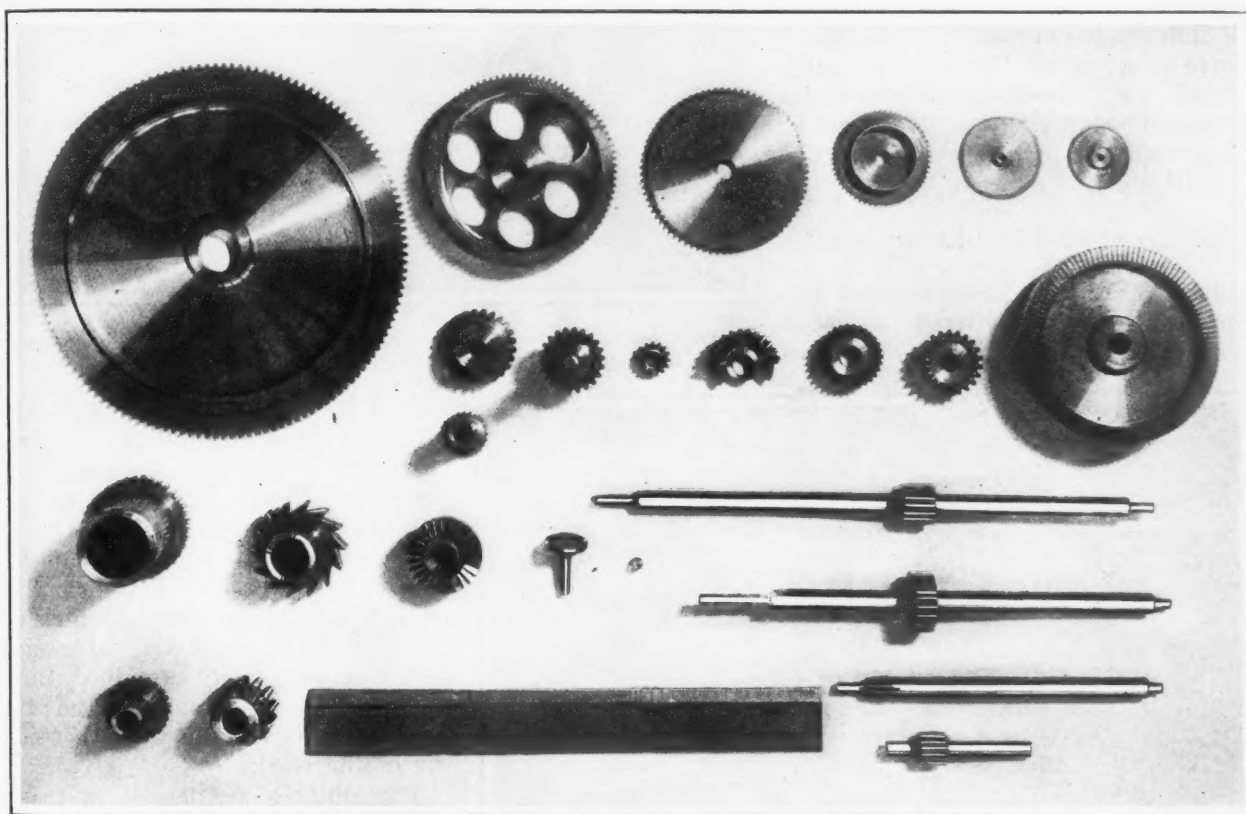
Spur and Bevel Gears and Other Parts Cut on the Hand Milling Machine for Use in Scientific Instruments
